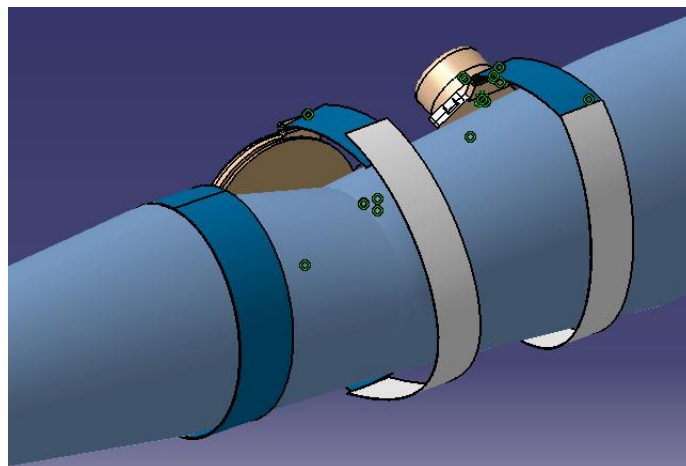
Rear View virtual assembled model wound on the right upper limb of manikin.
